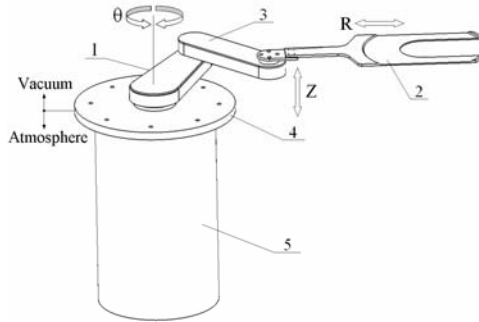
The model of wafer-handling robot: 1- Back arm; 2- Wafer holder; 3- Forearm; 4- Flange; 5- Enclosure
